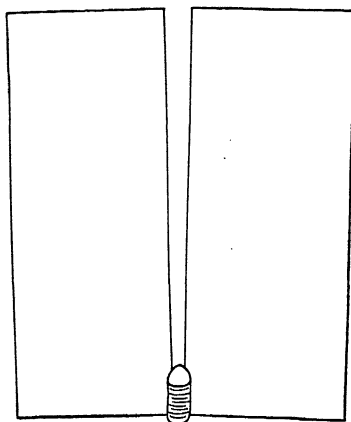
Plates spaced for welding to offset contraction.
